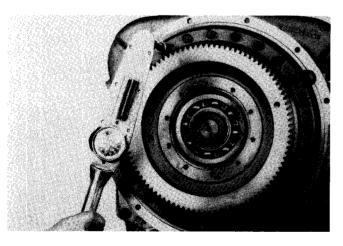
Install impeller cover to impeller bolts and washers. Tighten to specified torque (see torque chart).
